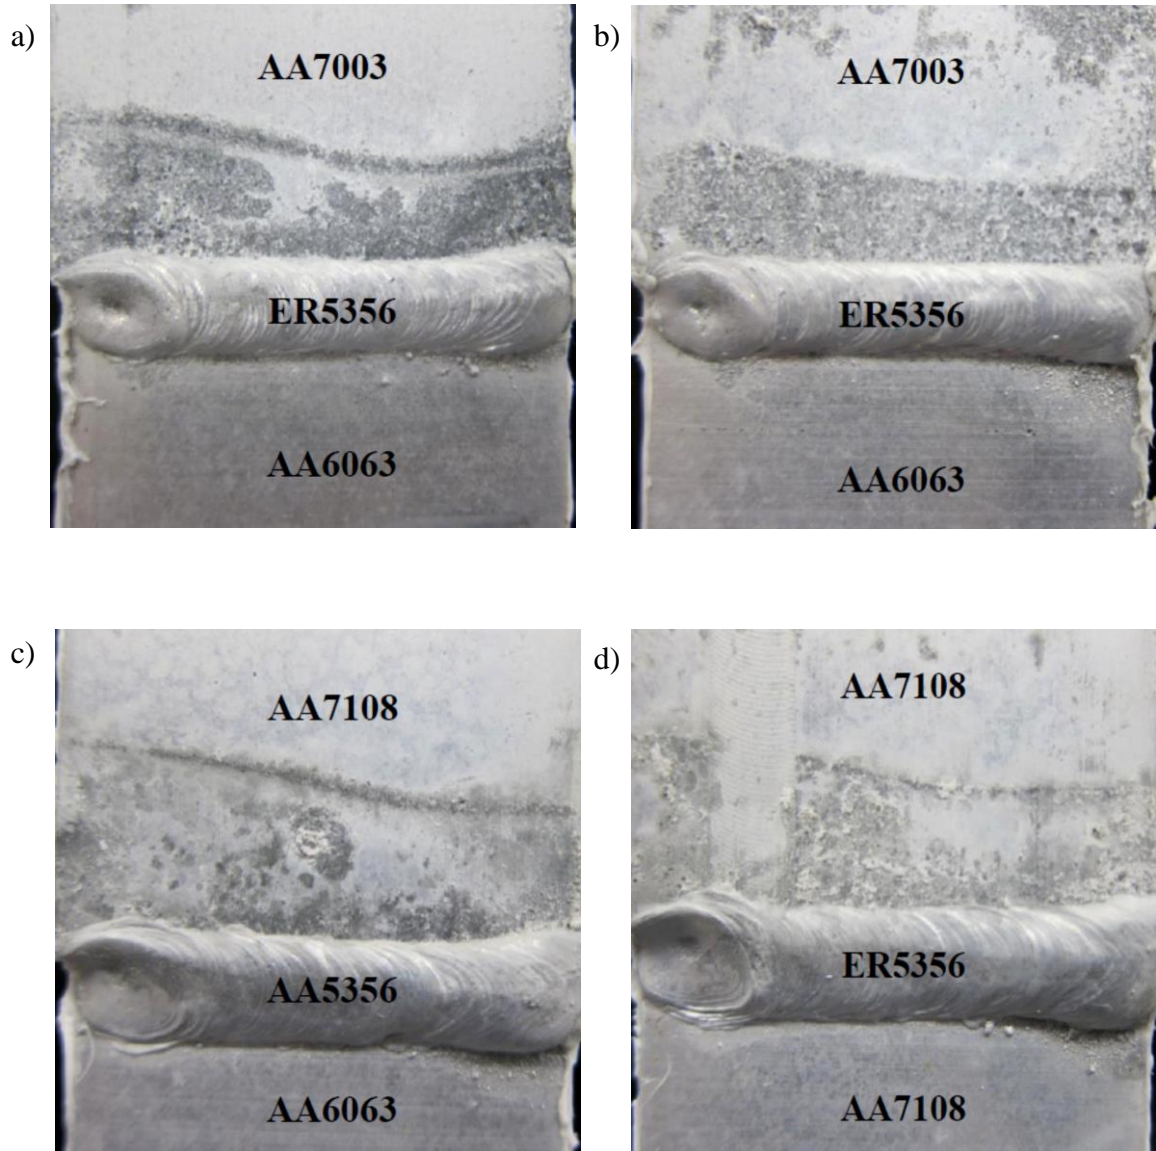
Photographs of lap-joint welded AA7003 (configurations A1 and A3) in (a) as-welded T6 condition, (b) as-welded T6+PB condition and lap-joint welded AA7108 (configurations C1 and C3) in (c) as-welded T6 condition, (d) as-welded T6+PB condition exposed to ASTM G85-A2.
